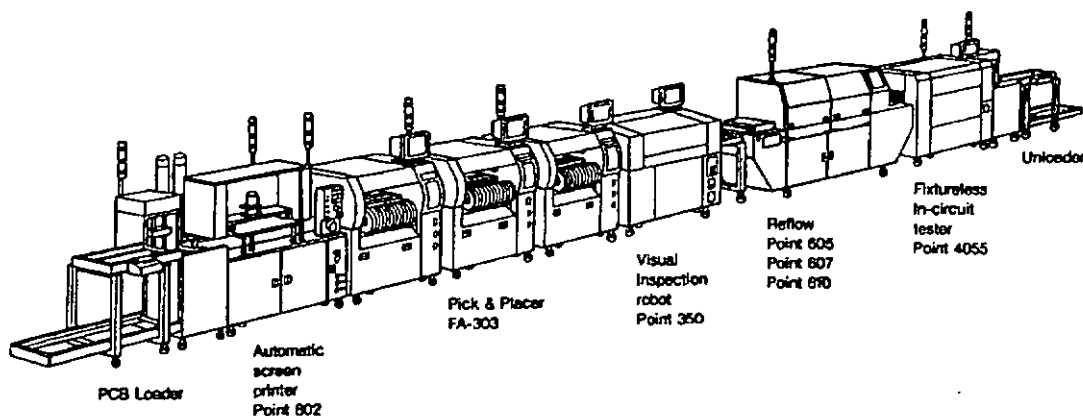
A TYPICAL PCB ASSEMBLY LINE
